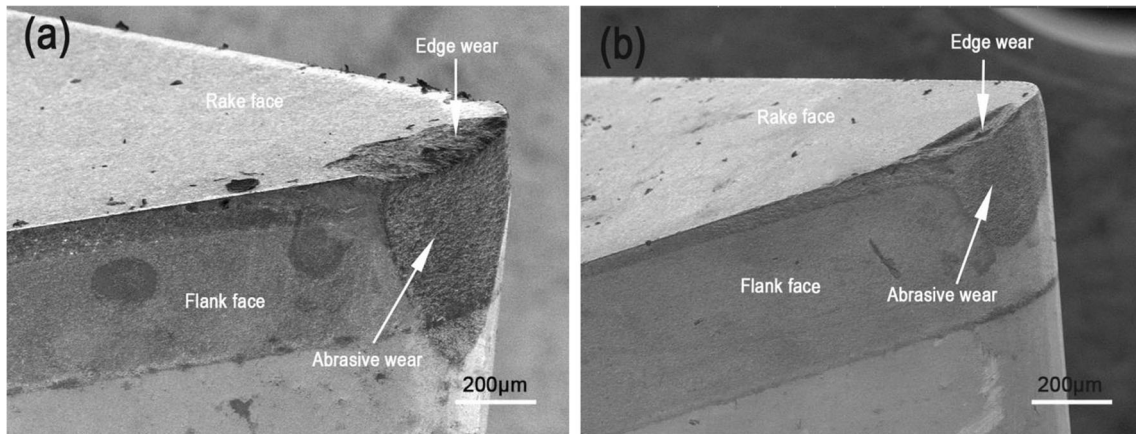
SEM image of PCD tool following machining: a conventional machining and b LAM
